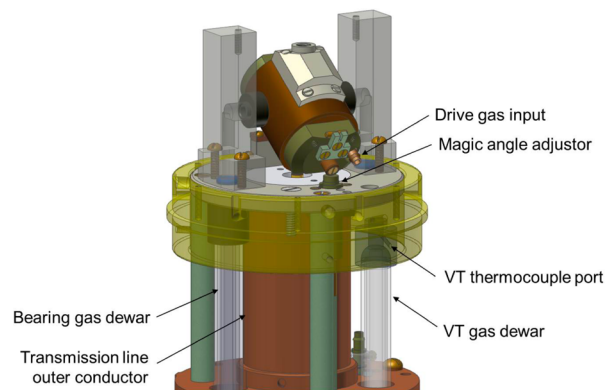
View of 900 transmission line 3.2 mm MAS probe head, showing VT, bearing, and magic angle adjustment components.
